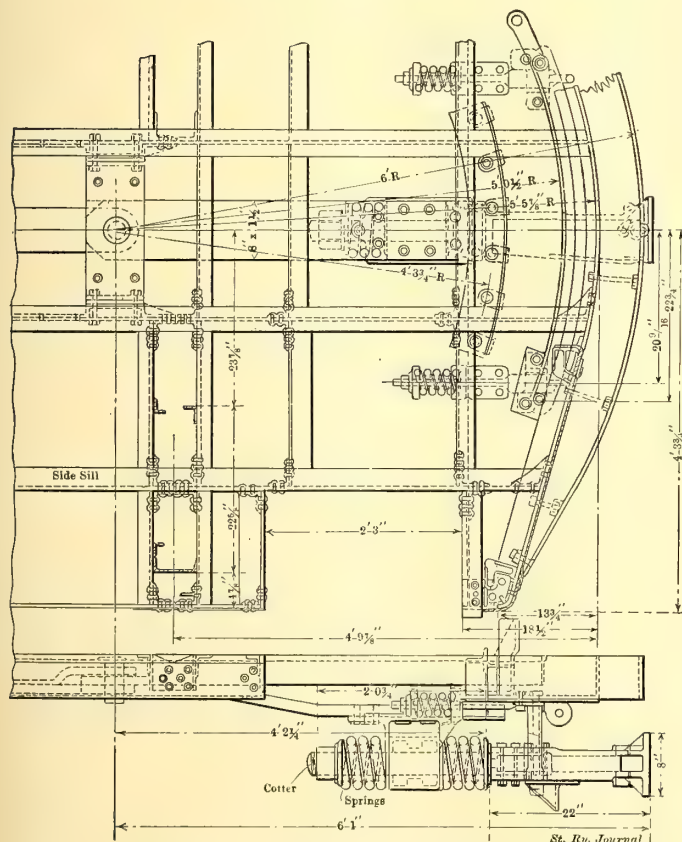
PLAN AND LONGITUDINAL SECTION OF DRAFT RIGGING
